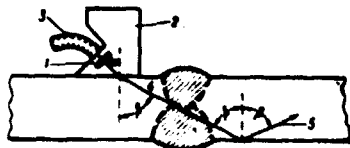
Inspection of a welded joint by a direct ultrasonic ray. 1) Piezoelectric element; 2) body (prism) of the search head; 3) hose connecting the search head and the ultrasonic flaw detector; 4) inclined ray of ultrasonic shear vibrations which enter the product being inspected at angle β ; 5) ray reflected from the opposite wall of the product.
